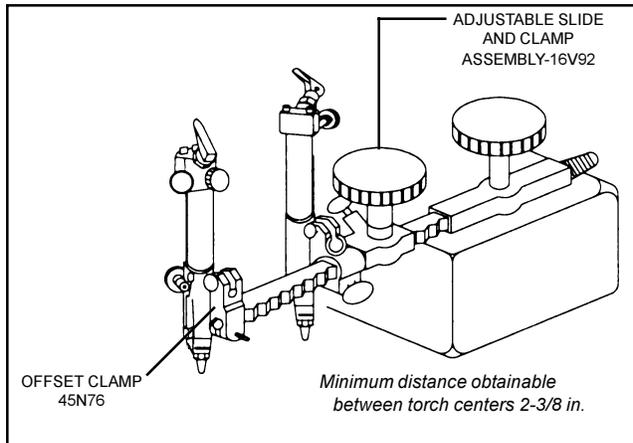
Setup for Double Torch Operation with Both Torches on Same Side of Carriage
